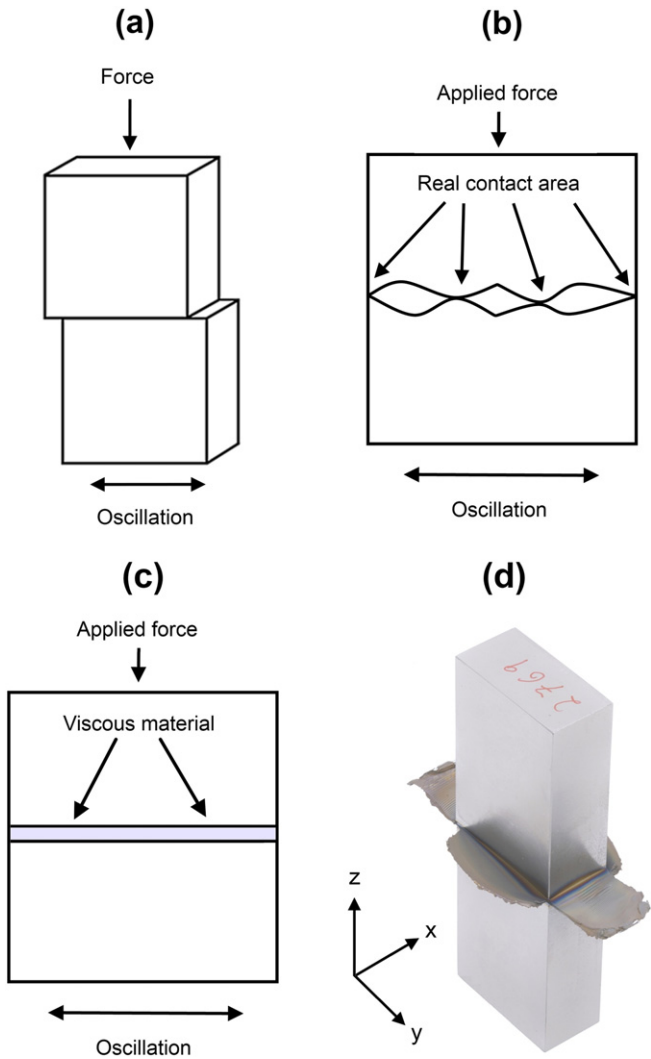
(a) Illustration of the linear friction welding process, (b) asperity interaction, (c) viscous flow, and (d) a completed Ti–6Al–4V weldment showing the expelled interface material (flash) where oscillation took place in the y direction [4,5].
